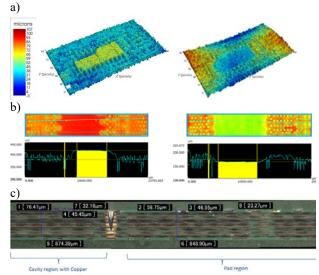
a) Contours for PCB A with copper plane in center cavity and PCB B without cavity copper plane b) Laser confocal microscope height profile measurements on PCB A and PCB B c) Center cavity copper plane cross-section of PCB A
